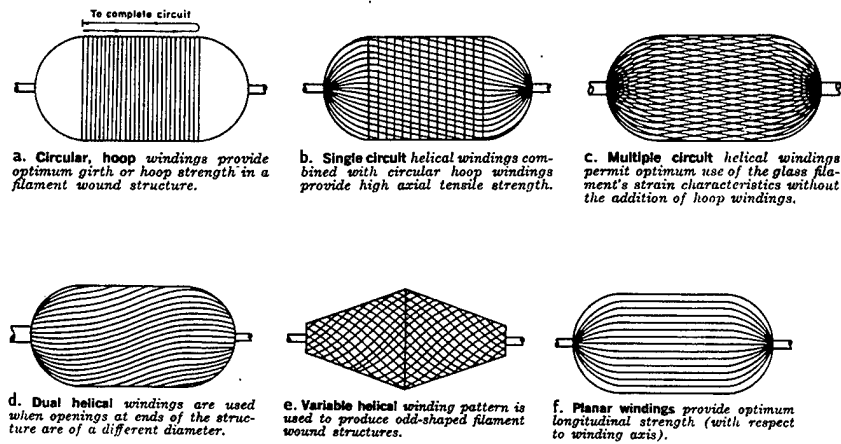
Filament winding patterns. (Courtesy of Materials in Design Engineering.)
